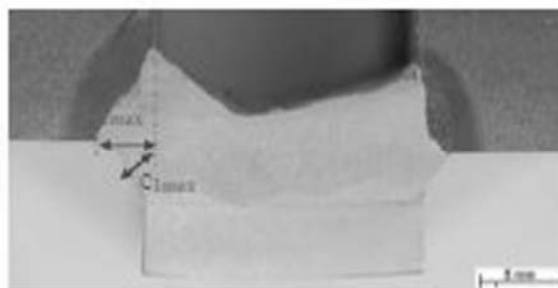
Root weld geometry after optimized parameters and magnetic arc deflection in cross section at $\frac{3}{4}$ of weld length.
